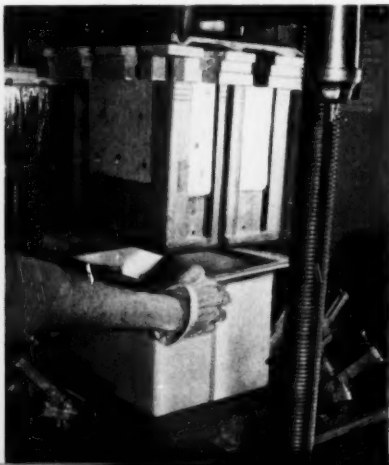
Front cover for orange juicer is formed by blowing heated sheet against polished wood male mold. Clamping ring is hanging on lower air valve of press
